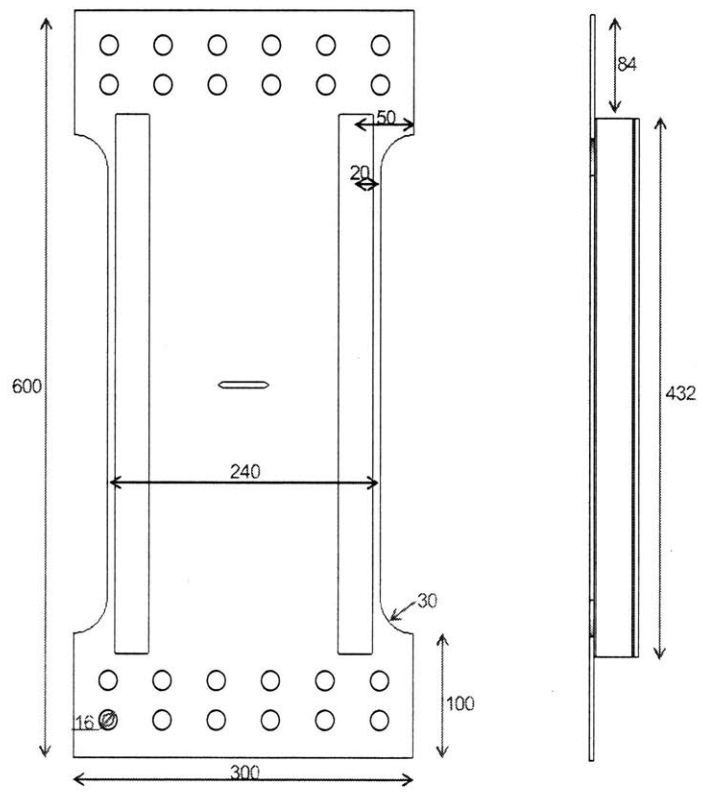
Twin Stiffened Center Cracked Tension (TSCCT) specimen geometry subjected to quasi-static uniaxial tensile loading (dimensions in mm)
